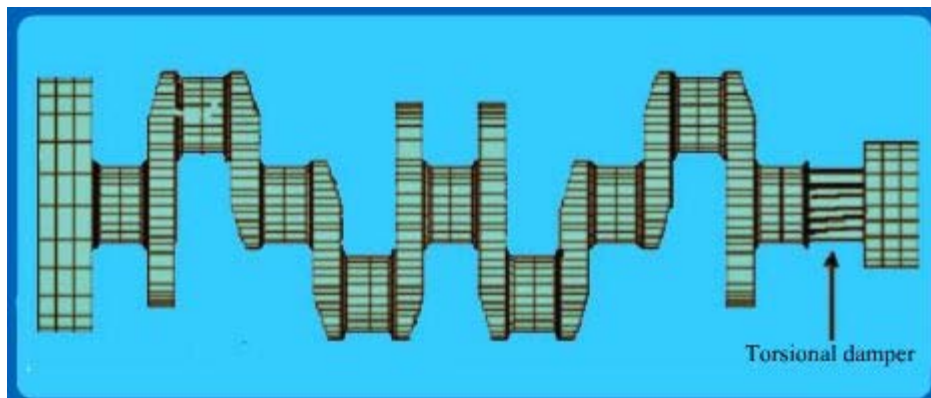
A typical multi-cylinder engine crankshaft
